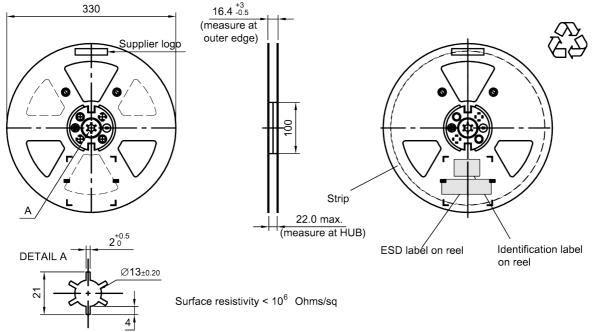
Drawing of reel (first-angle projection) with diameter of 330 mm.
